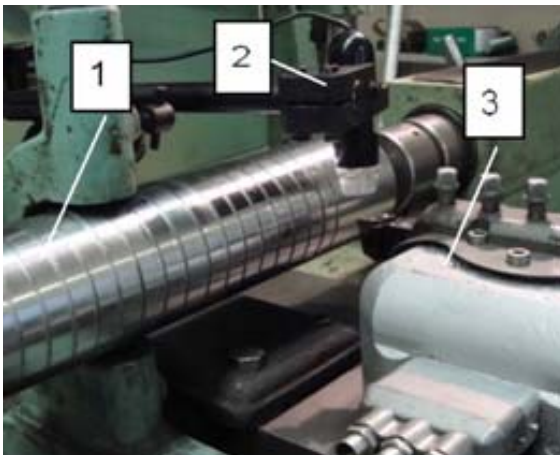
Experimental scheme: 1- machined part; 2 – digital microscope; 3 – UDM – 600 dynamometer
